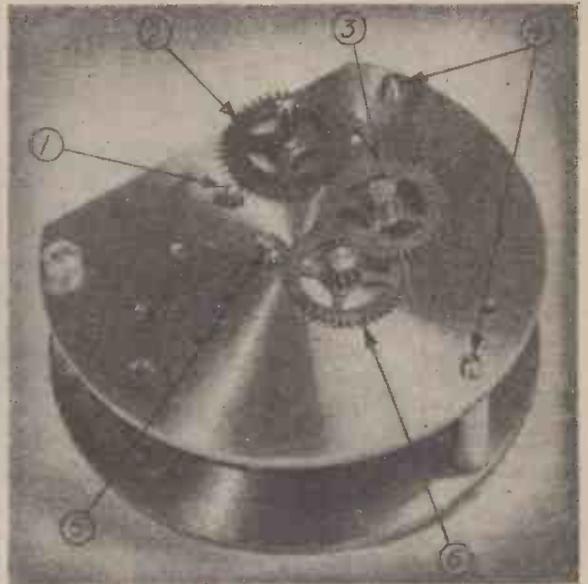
General view of Smith's car clock showing modifications to minute and hour wheel positions. 1. Original minute wheel stud. 2. Original hour wheel in new position fitted on long spindle with six-tooth pinion pressed on. 3. Intermediate wheel. 4. Legs 3/4 in. long screwed on to these existing studs to support clock on turntable. 5. Cannon pinion spindle cut short. 6. New position of minute wheel.
